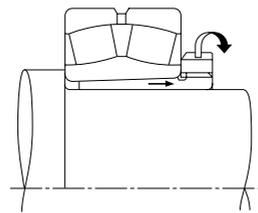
Removal of Withdrawal Sleeve Using Withdrawal Nut (1)
